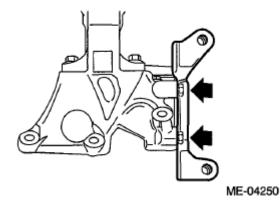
Locating Turbocharger Upper Stay Courtesy of SUBARU OF AMERICA, INC.
